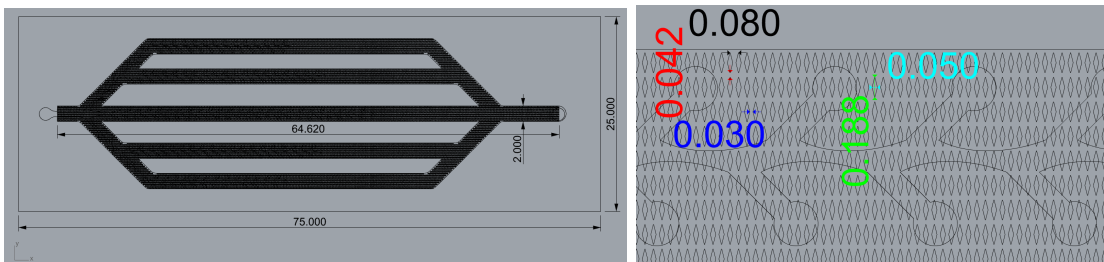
Mask CAD for glass etching, with a pillar zoom on the right: Dimensions are expressed in mm.
